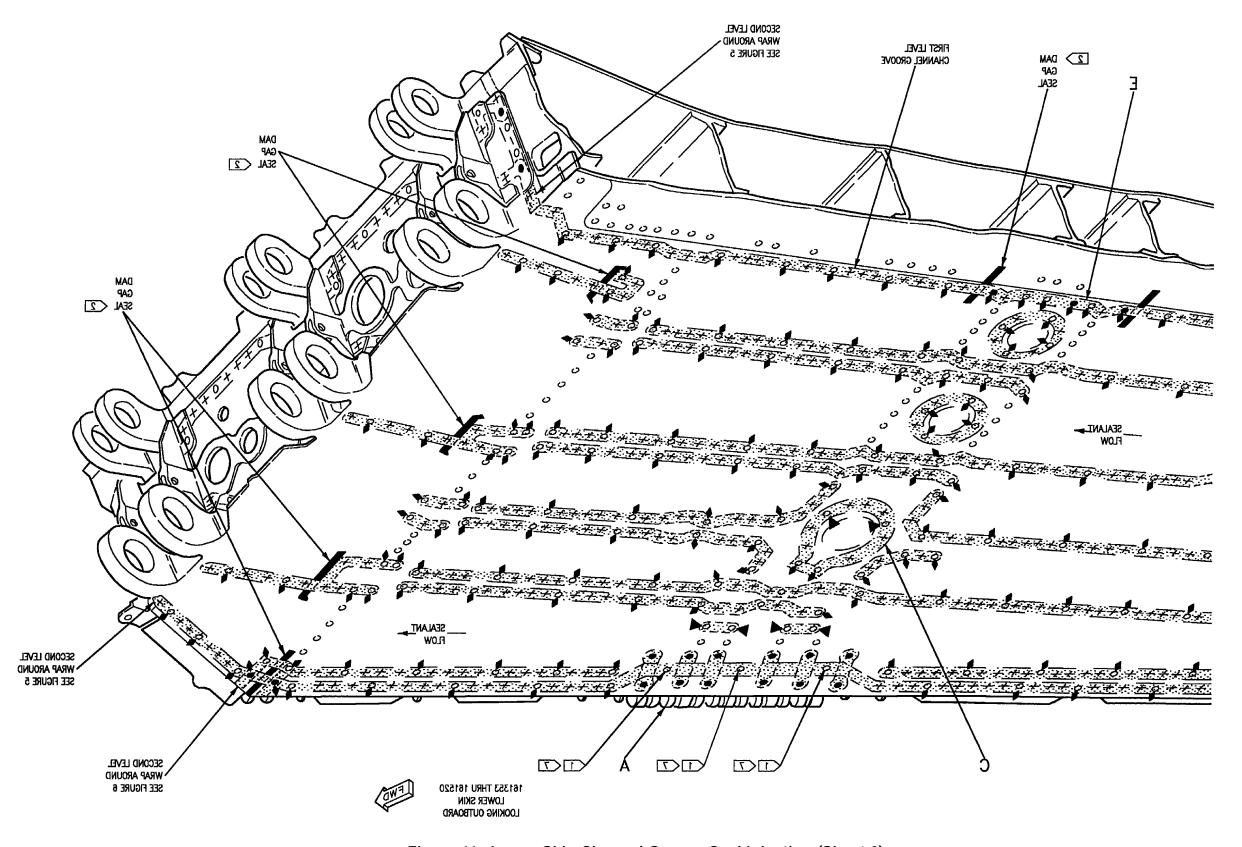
Lower Skin Channel Groove Seal Injection (Sheet 2)
